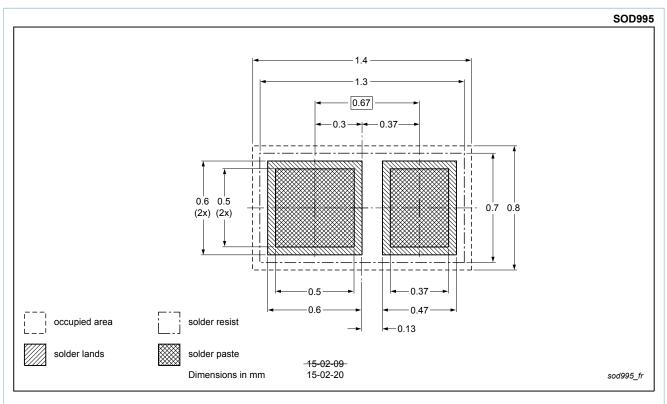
Reflow soldering footprint for DSN1006U-2 (SOD995)
